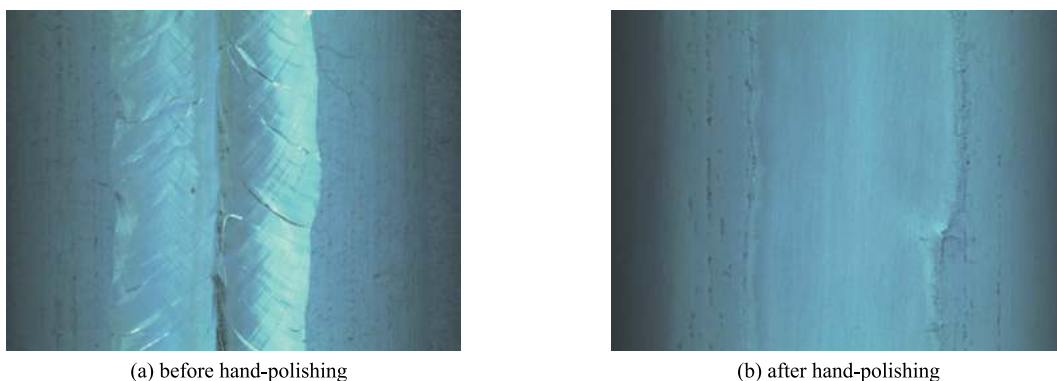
Weld seam on equator of #1300S3 cavity
